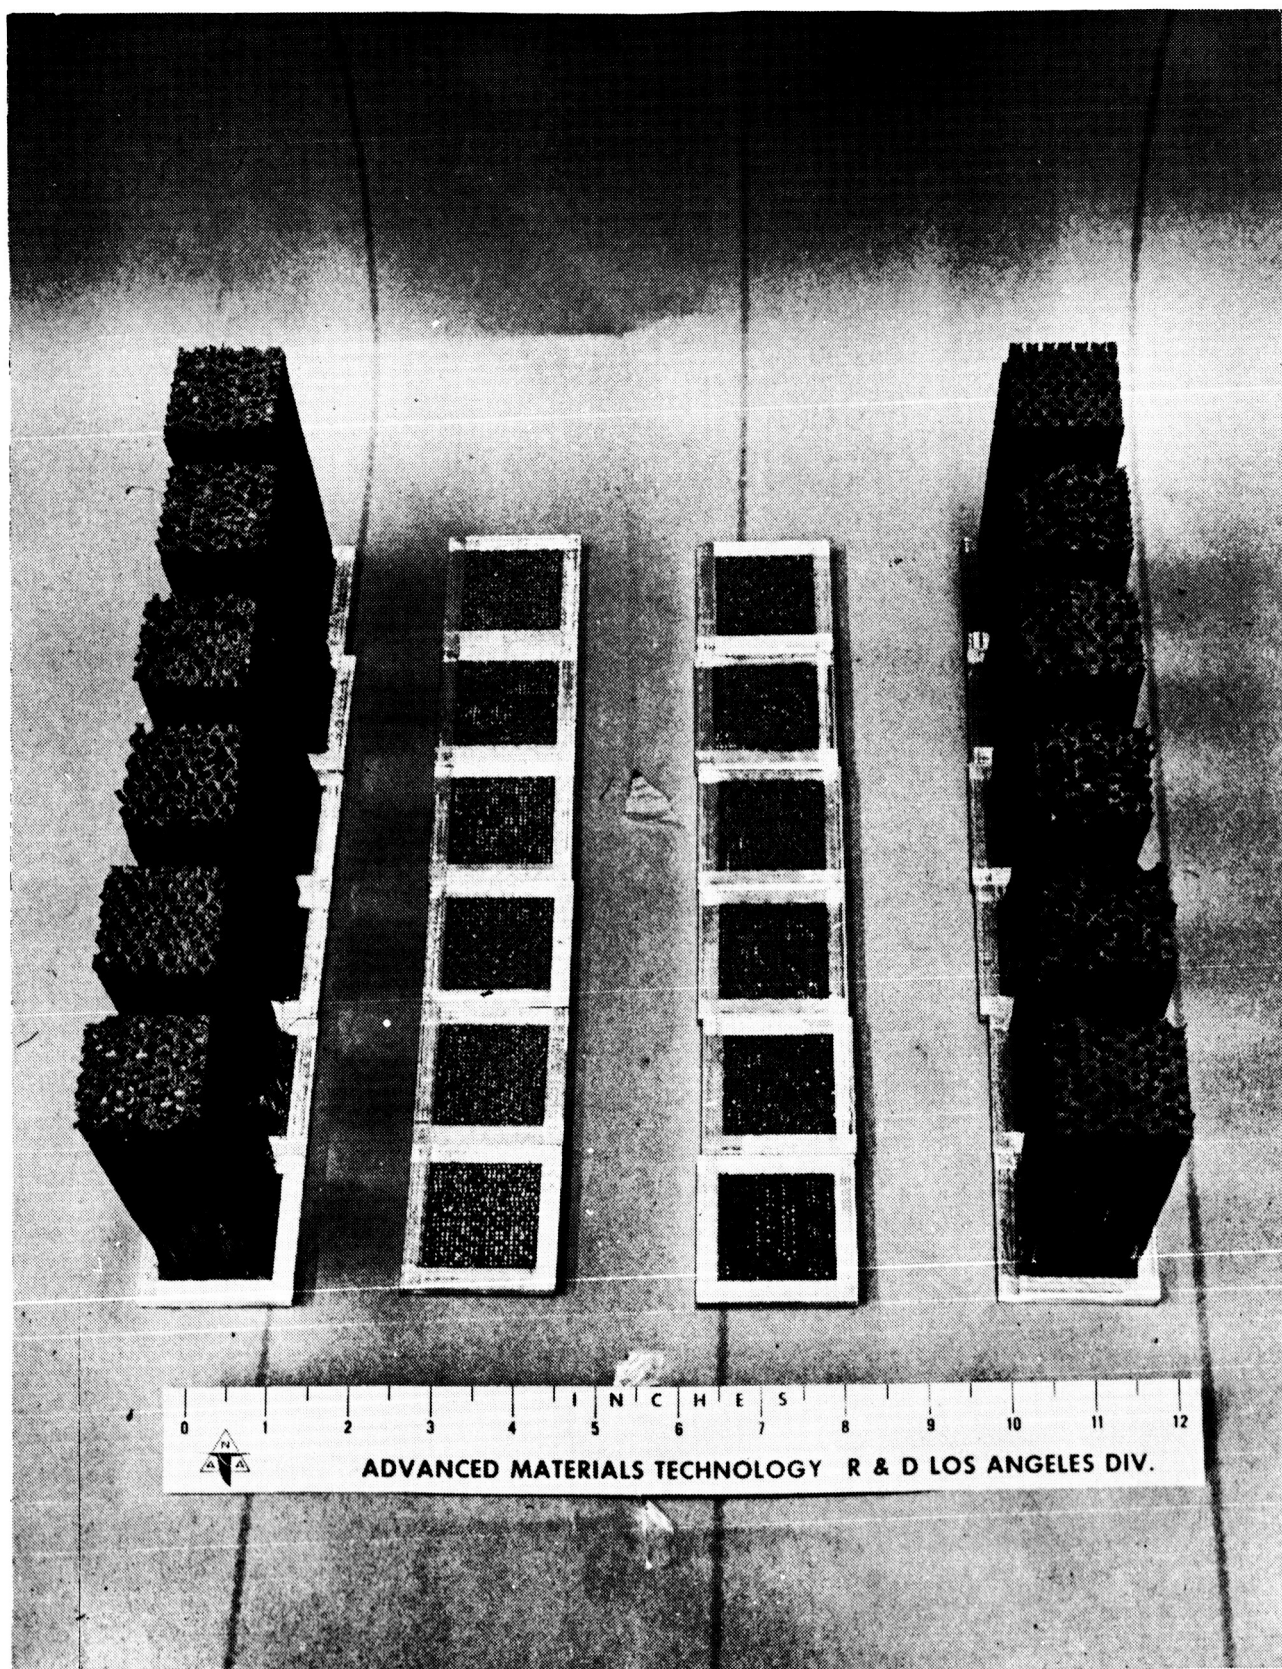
HRP Honeycomb Flatwise Tensile Specimens - HT424 Adhesive
